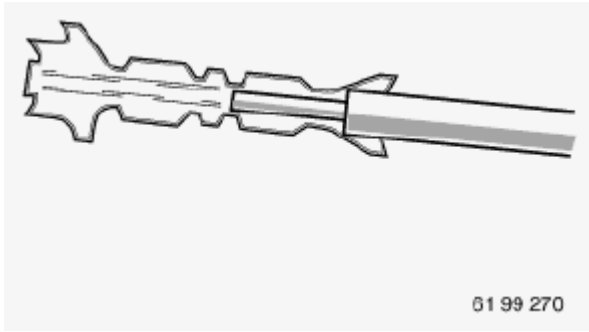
Identifying Crimp Butt Connector On Preassembled Wire End
